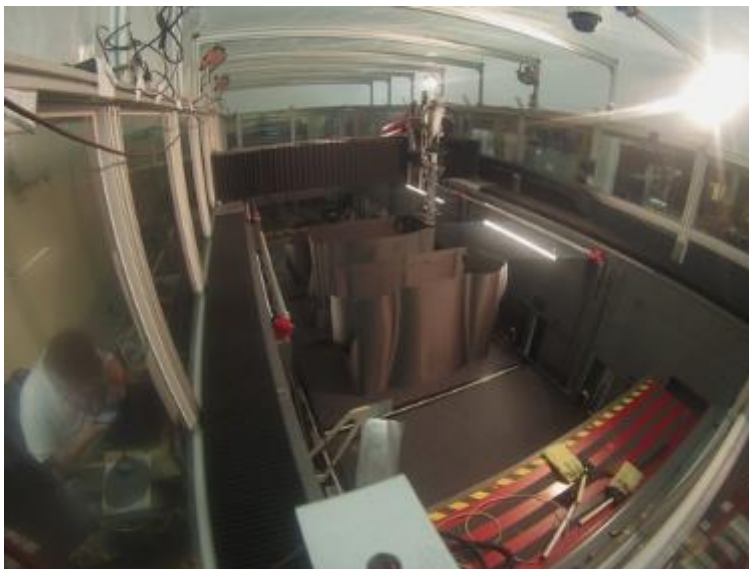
The printing of a full size car with the BAAM machine, showcasing the machine's capabilities [28].
